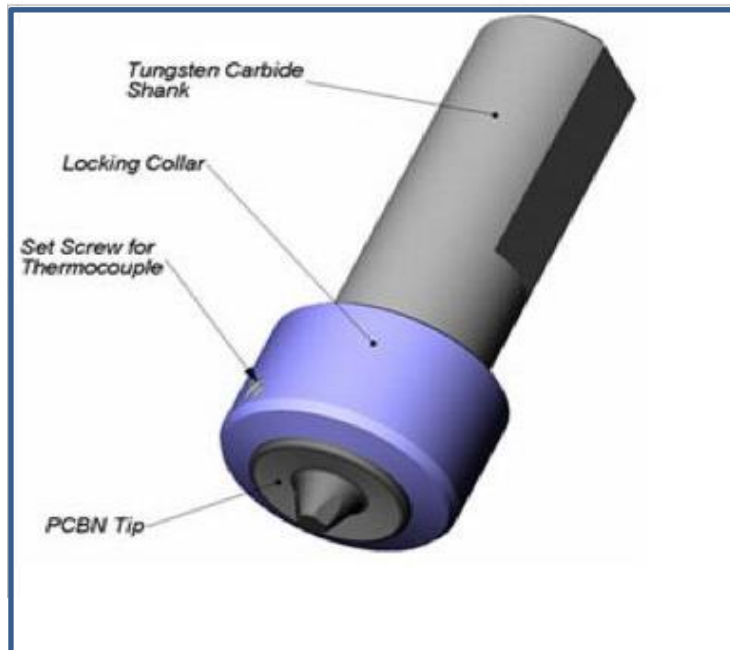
A schematic a typical FSW tool used for the welding of steel [75]
